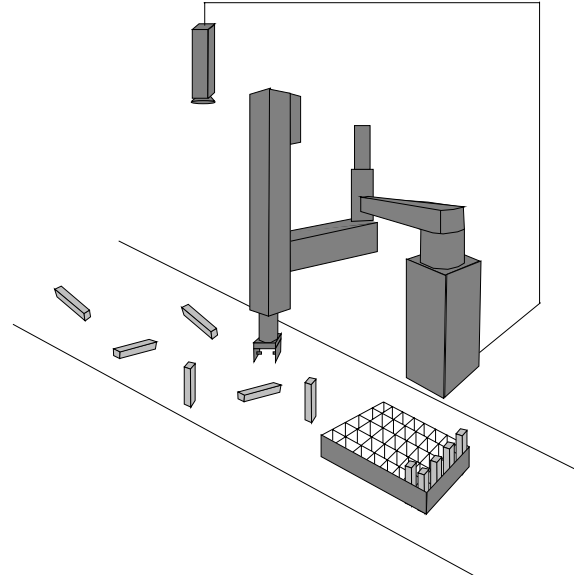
A parts feeder using a commercially-available system that integrates machine vision, high-speed robot arm, and pivoting gripper. This illustration shows the system feeding rectangular parts into a square pallet.
